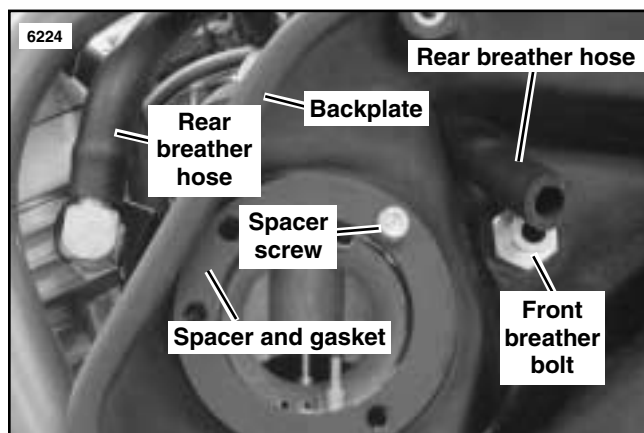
M2 or S3 Stock Air Cleaner Spacer
